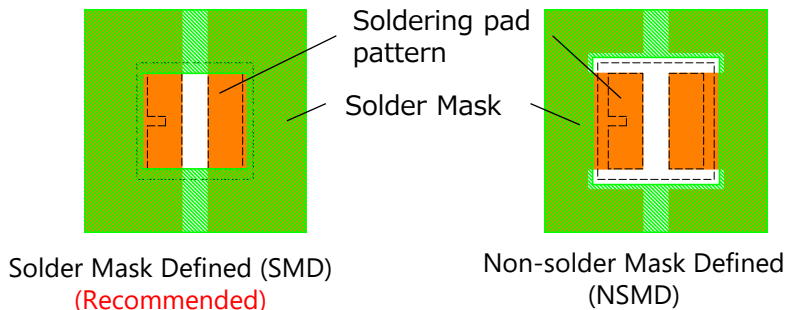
Copper Layer Designs to Create the Soldering Pad Pattern
